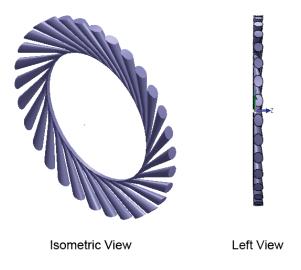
Modified "tilted" 30-pipe geometry - isometric and left view
